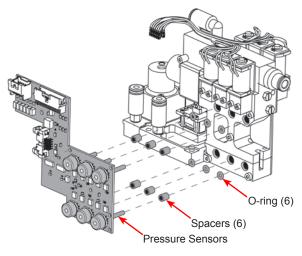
Infusion PCB Removal (View rotated 90° CCW)
